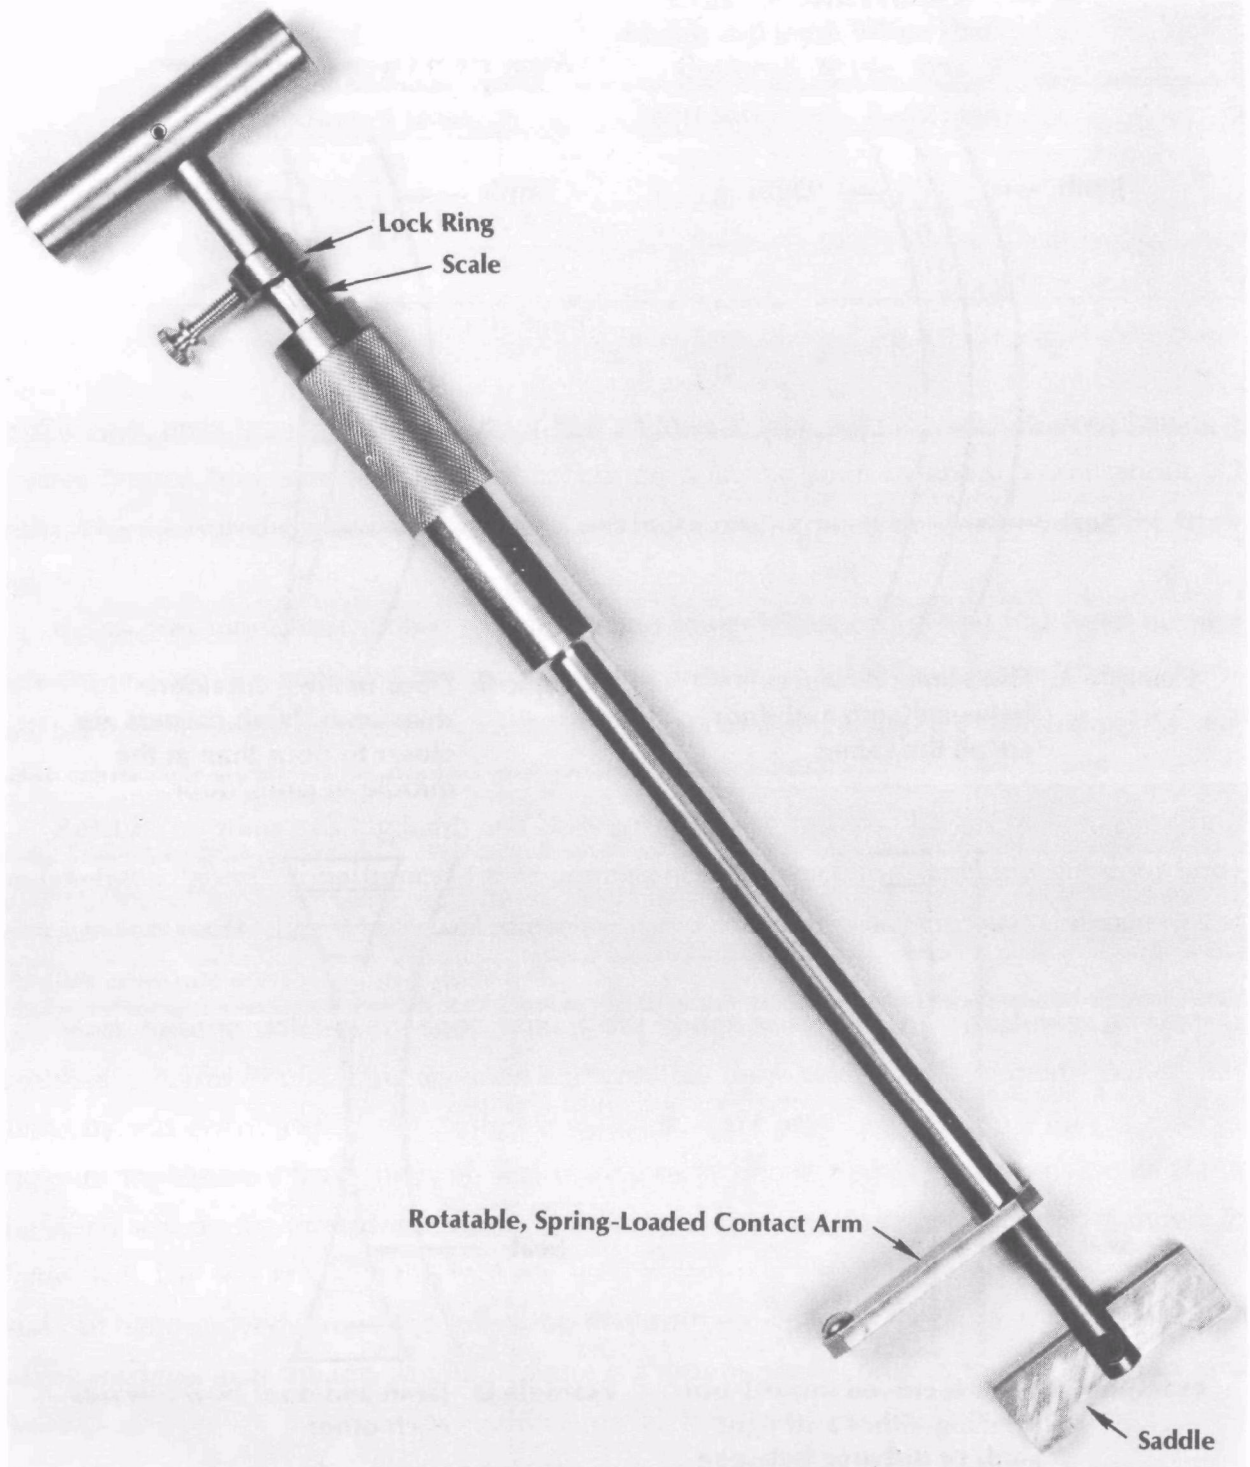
TOOL DESIGNED FOR MEASURING THE HORIZONTAL DISTANCE BETWEEN THE INBOARD EDGE OF ANY DOOR FRAME AND THE SEALING SURFACE OF THE ACCOMPANYING JAMB
